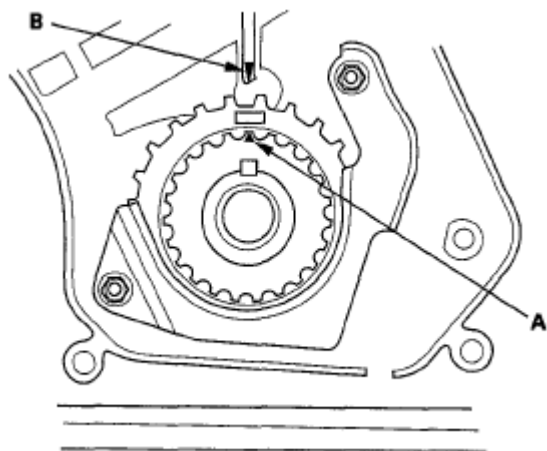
Aligning TDC Mark On Tooth Of Timing Belt Drive Pulley
